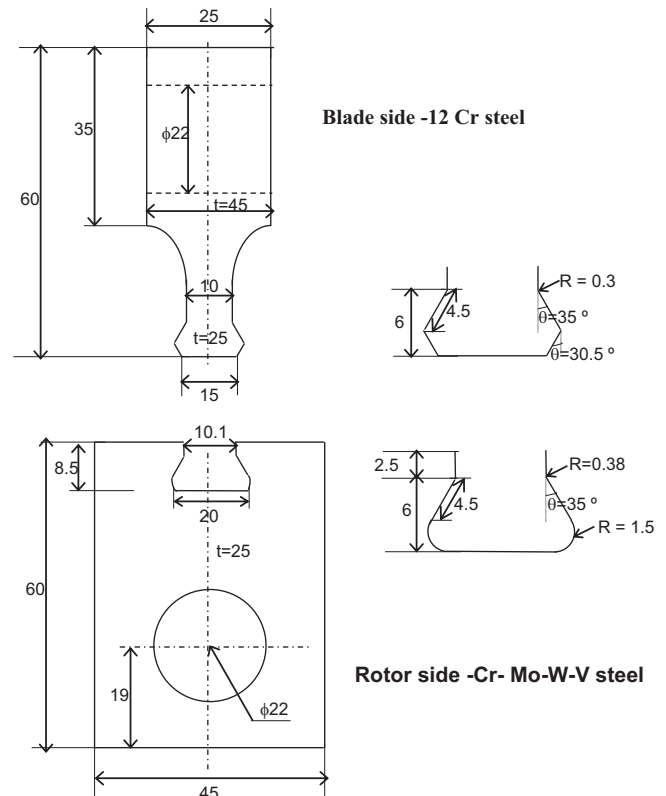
Shapes and dimensions of dovetail joint specimen.
